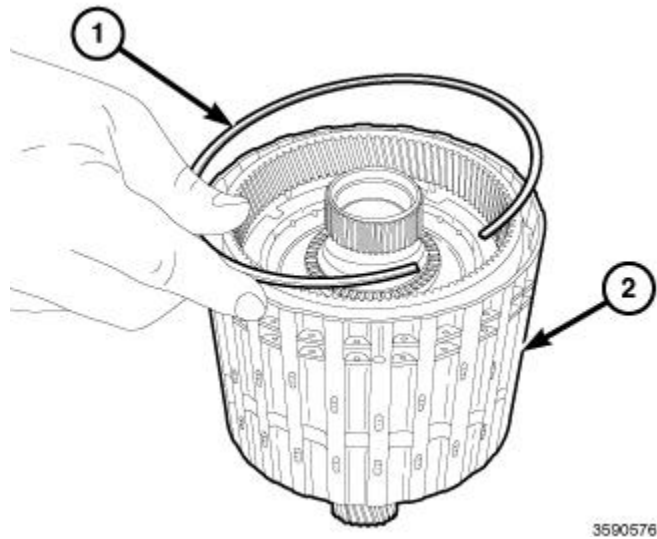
Snap Ring & P4 Sun Gear/C/E Clutch Retainer
